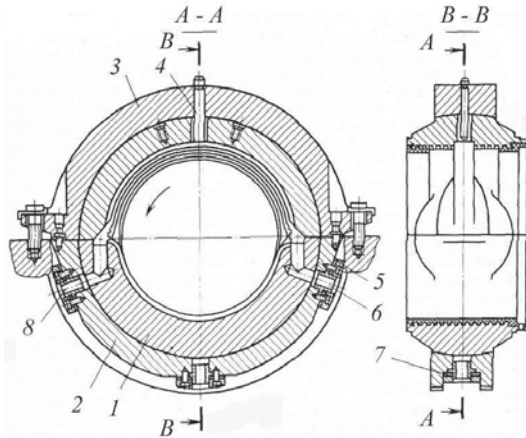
Journal bearing of a 50 MW gas turbine engine:
